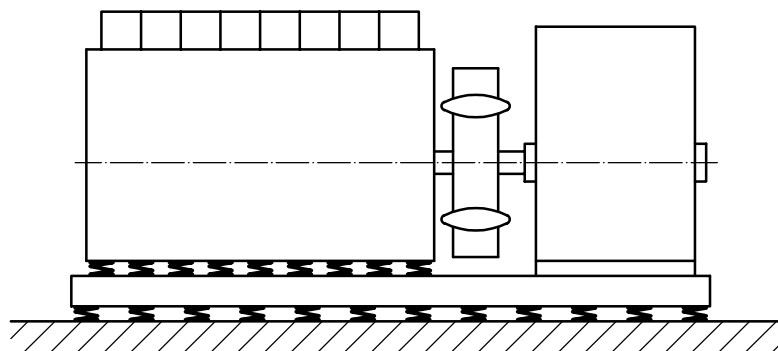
Engine resiliently mounted, generator rigidly mounted on resiliently mounted base frame, flexible coupling
